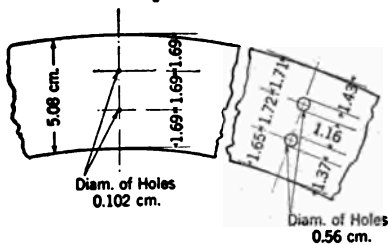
SHOWING POSITIONS OF HOLES FOR BELT WINDINGS
